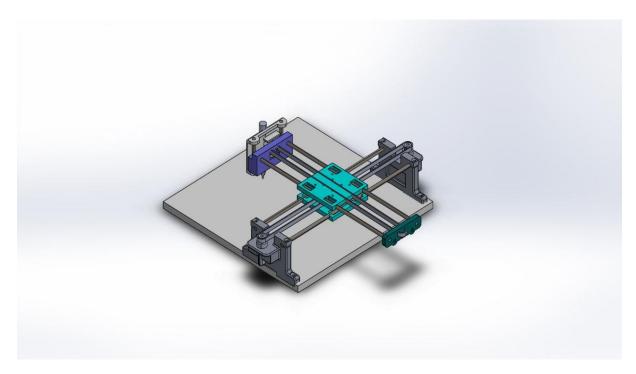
3D Printed Support Structure Assembly of XY Pen Plotter
